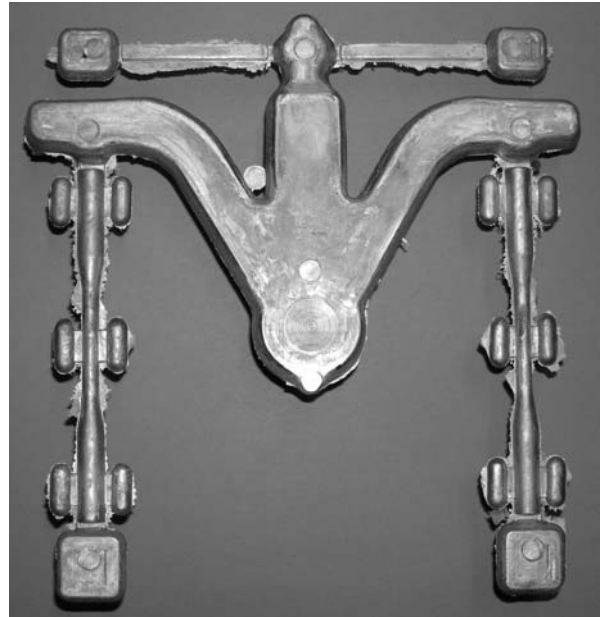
Macrographs of AZ91 magnesium alloy experimental casts fabricated on the Polak cold-chamber die-casting machine with 160 tons locking force in the "SILUM" Foundry
